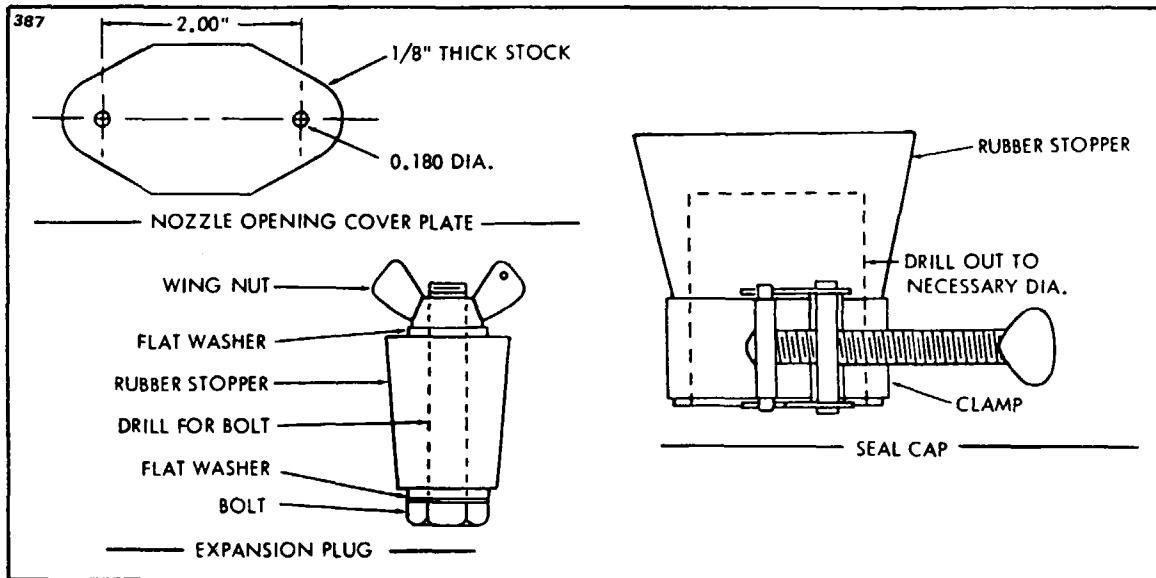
Suggested Design for Seal Plate, Plugs and Caps for Combustion Tube Leakage Test
